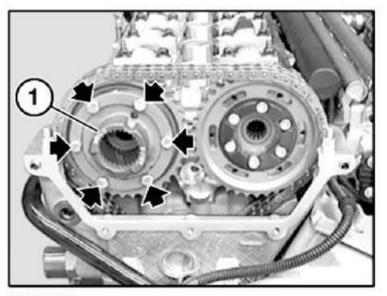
Aligning Bore Hole On Exhaust Side Courtesy of BMW OF NORTH AMERICA, INC.
